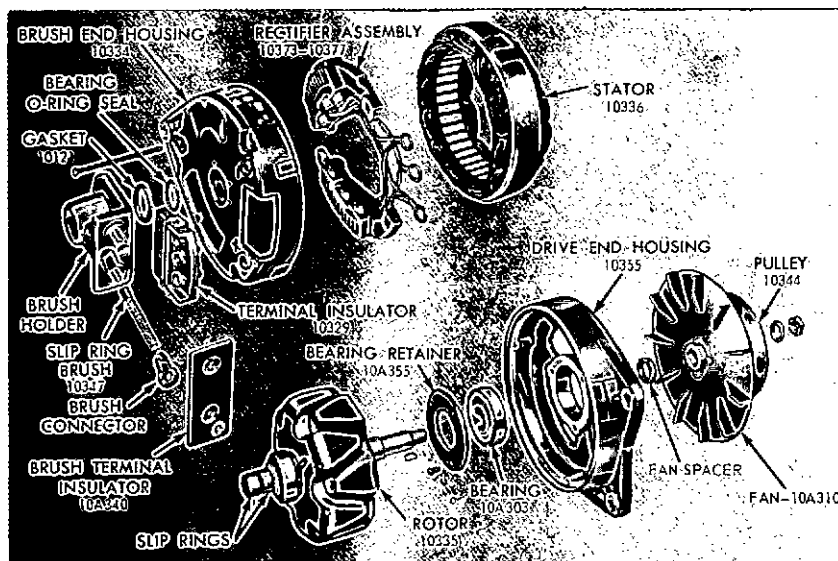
Disassembled 60-Amp Leece-Neville Alternator
